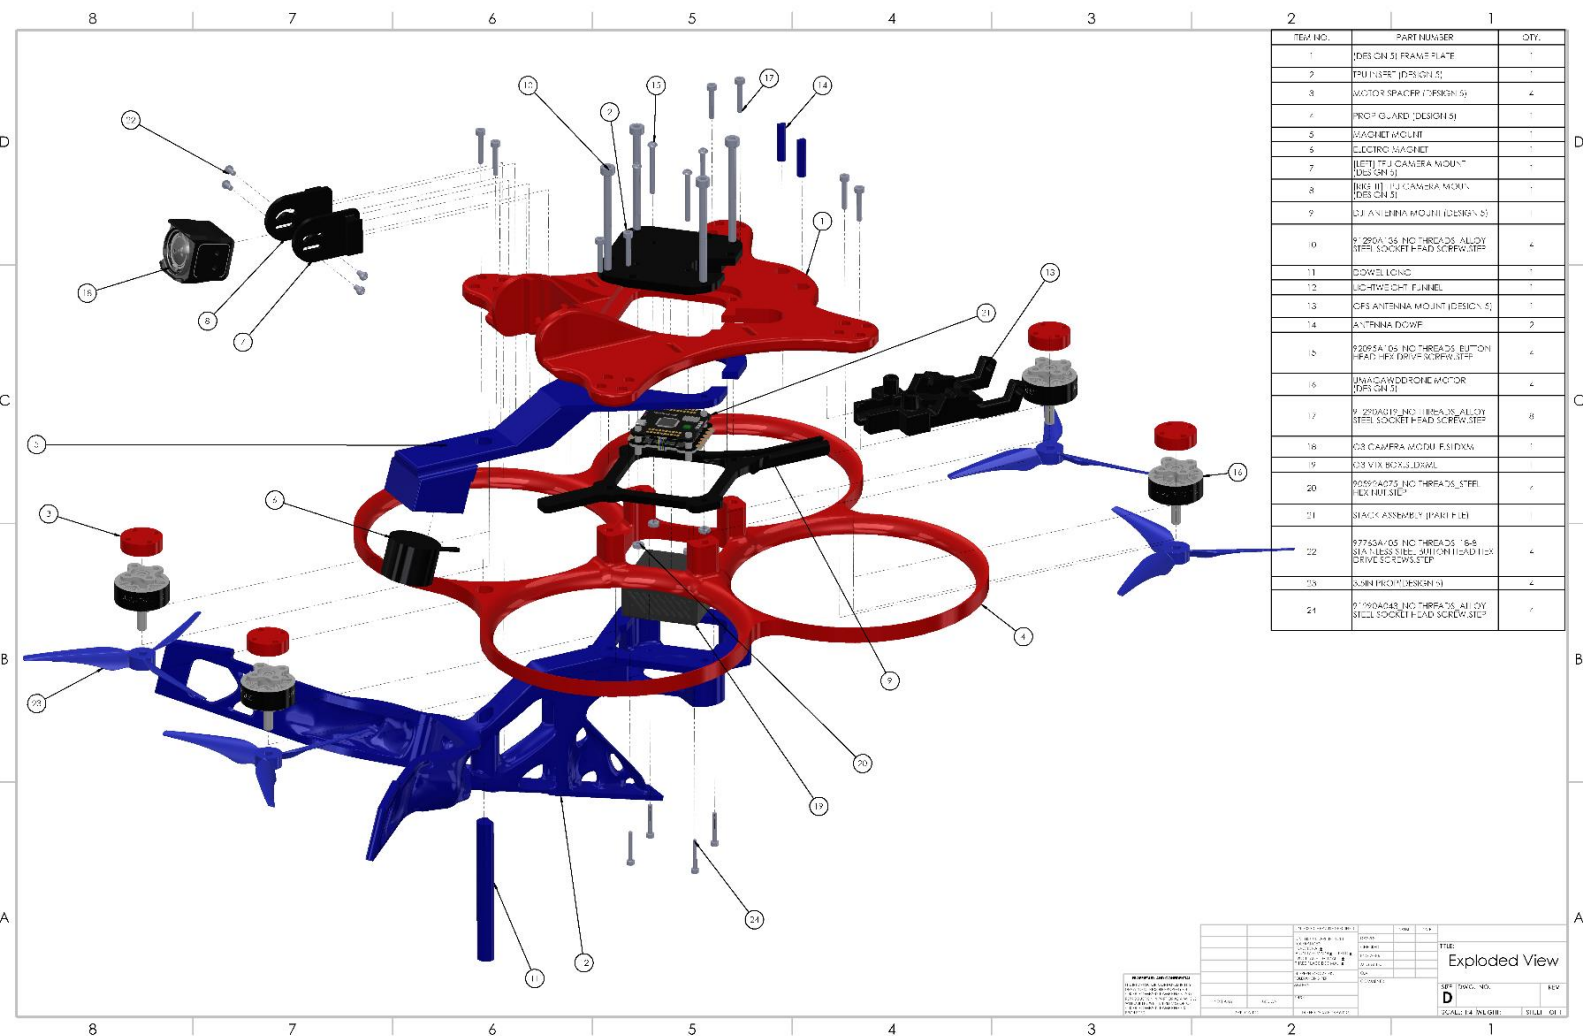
The exploded assembly of the final iteration as a CAD drawing.
